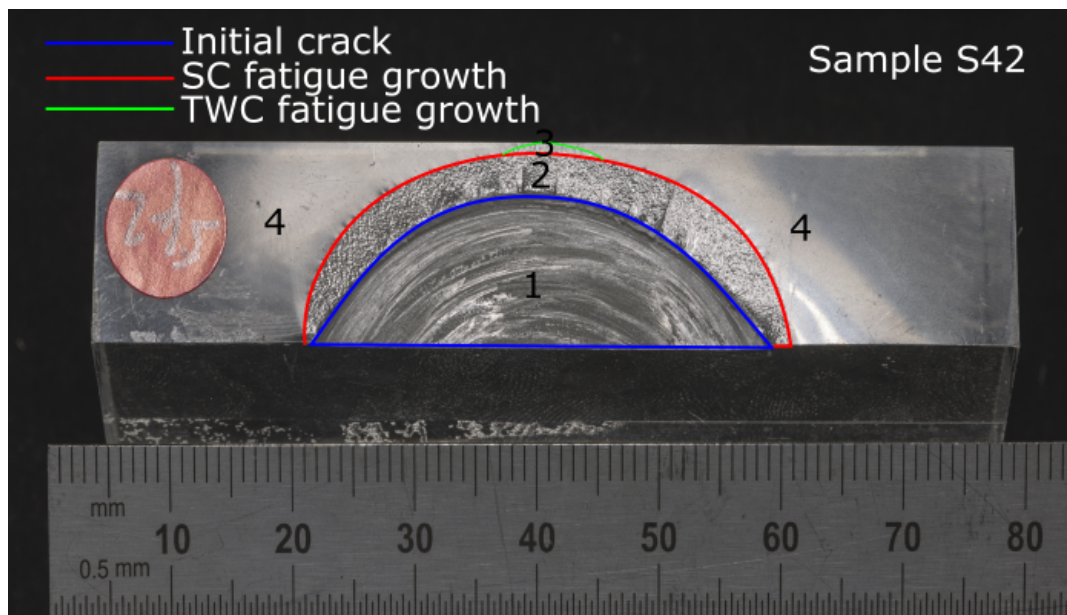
Test on Perspex plate - Fracture surface - Sample S42
